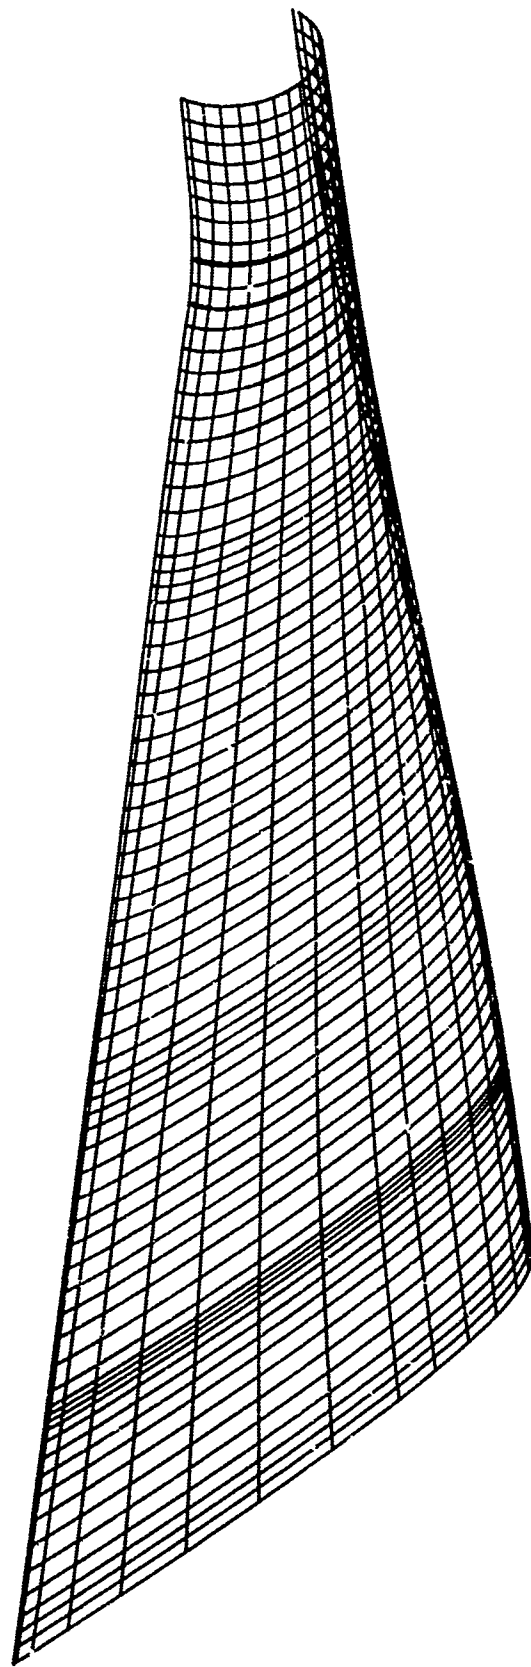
GRID ROUTINE FOR ROTOR BLADE DIMENSIONAL INSPECTION
